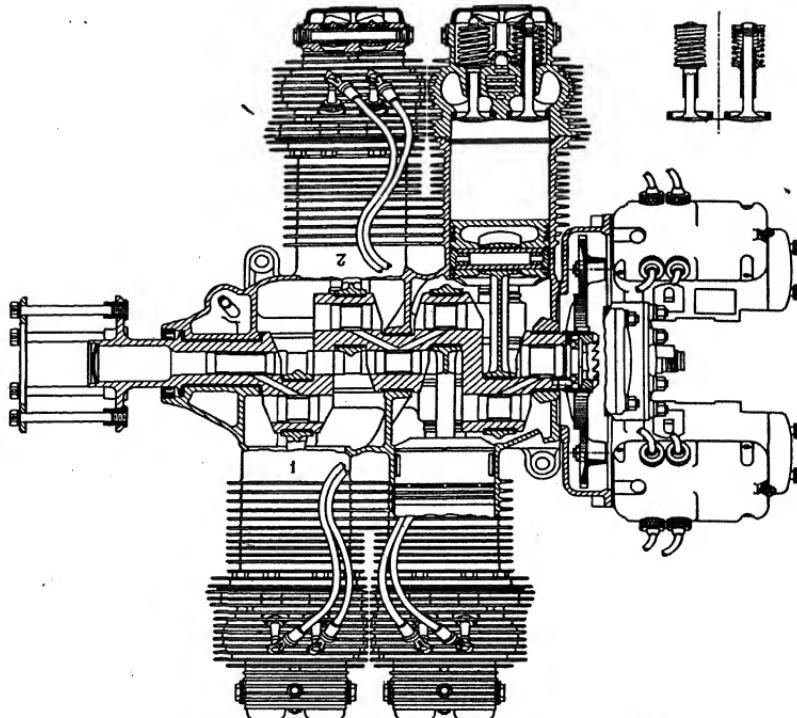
Section of Lycoming opposed engine—direct drive.
